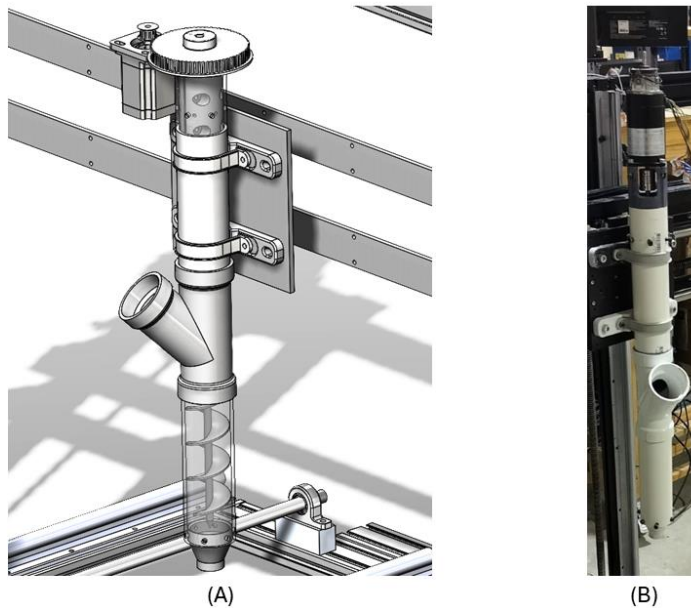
(A) CAD model of auger style nozzle; (B) Fully assembled nozzle.
